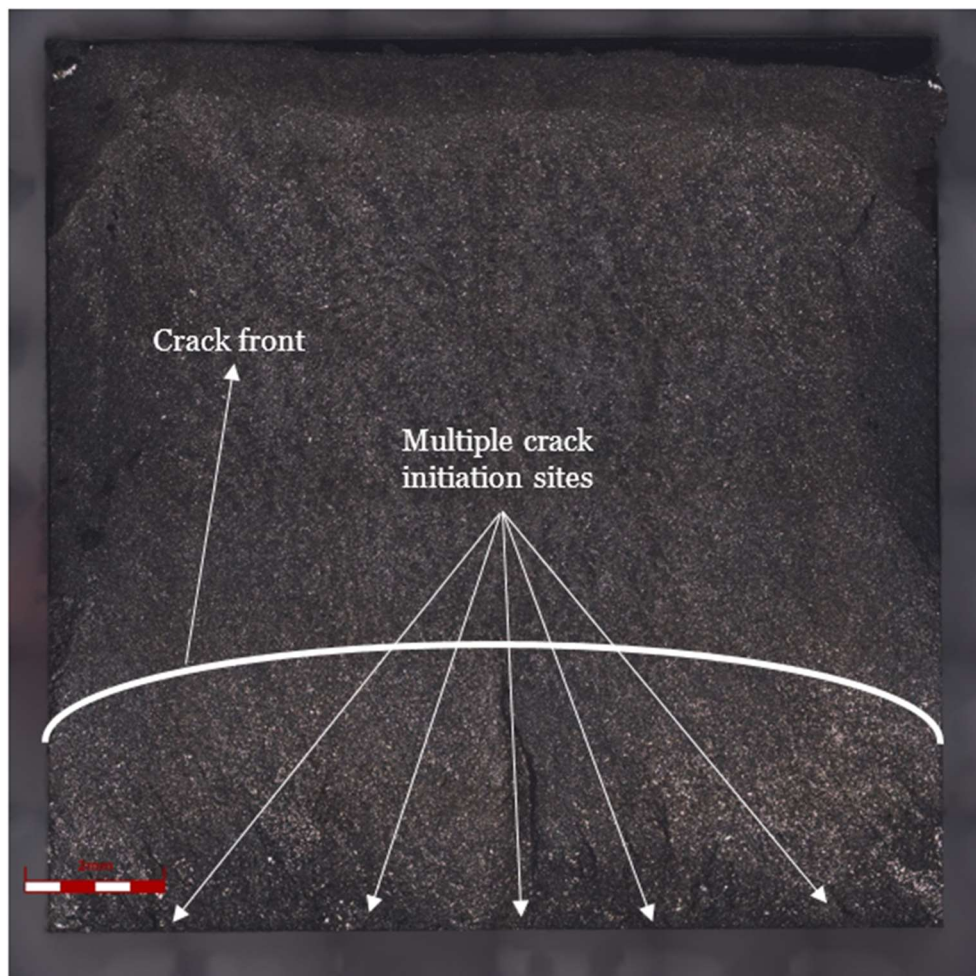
Confocal photograph of the fracture surface for the specimen under the contact of the cylinder pad with radius  $R=50\text{mm}$ .
